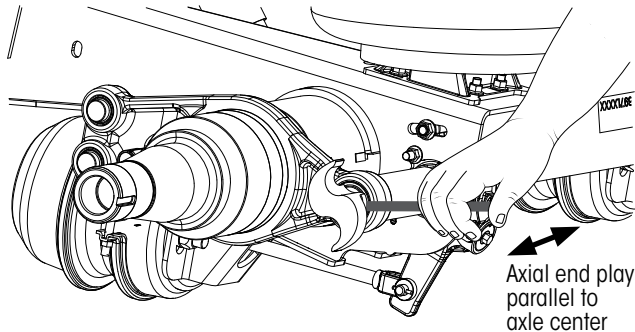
Checking S-cam axial end play (all except Cam Tube System™ models)
